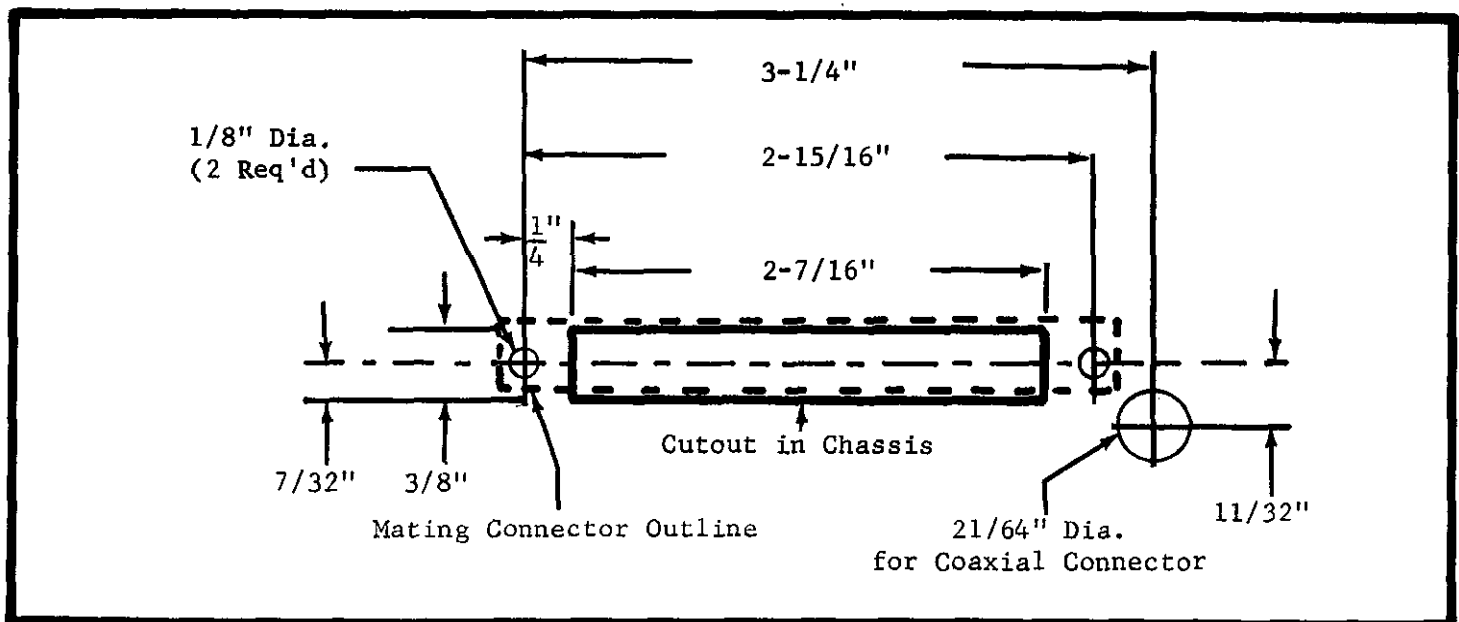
Mounting Hole Diagram. This gives dimensions for mounting mating connectors, Keithley Part Nos. CS-175-15 and CS-179.
